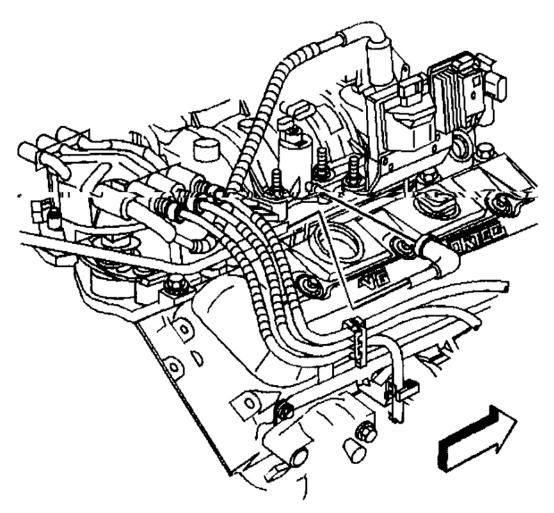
View Of Engine Wiring Harness Rear Bracket Nut Courtesy of GENERAL MOTORS CORP.
